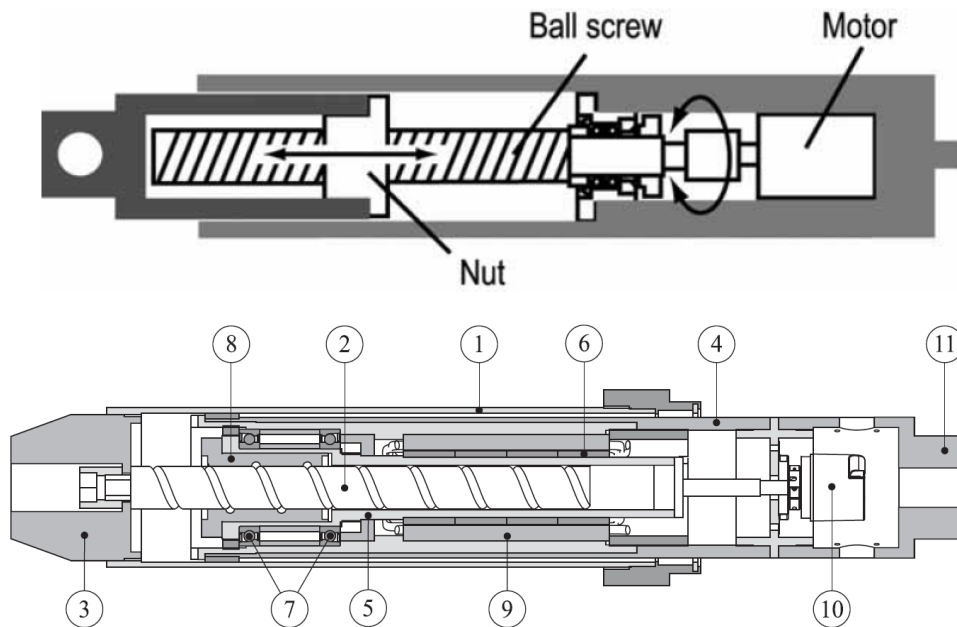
Shock absorber detailed section view. (1) Outer housing, (2) screw, (3) bottom cap, (4) inner housing, (5) rotor, (6) permanent magnets, (7) ball bearings, (8) nut, (9) stator, (10) encoder, (11) top cap.
